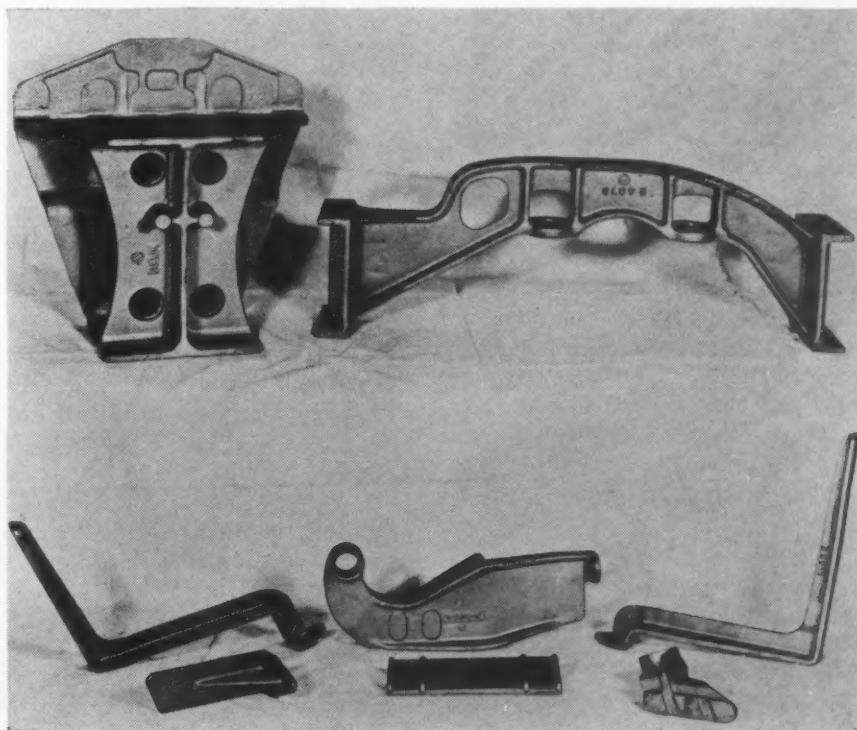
Malleable Castings Used in Construction of Six-Wheel Drive Truck.
